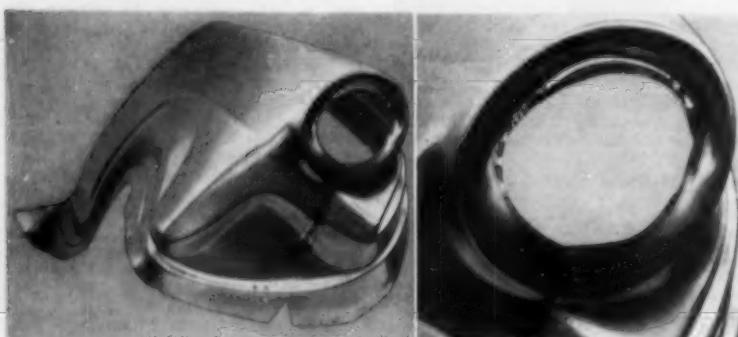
Full and Close-Up Views of a Front Fender Showing the Area of Deepest Draw. Blank was preshaped and welded into the form of a cone at the front section before forming. This reduces the severity of stretching so that cold rolled steel compatible with severity class 4 can be used. Without preshaping, the part could not have been produced from sheet of any quality.
